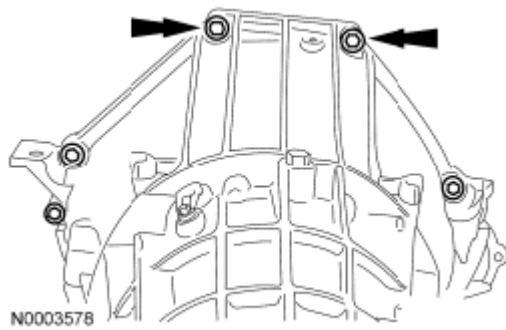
Locating Upper Transmission-To-Engine Bolts
